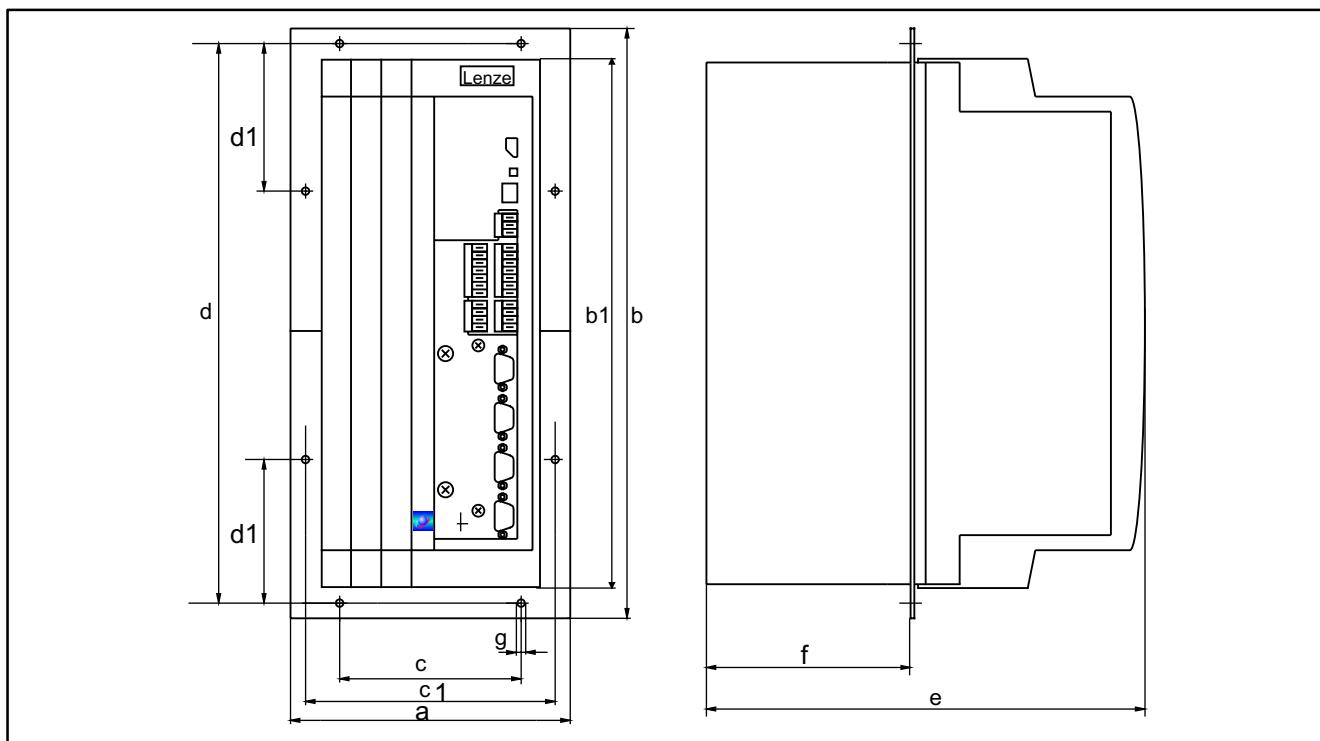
Dimensions for assembly with thermally separated power stage
